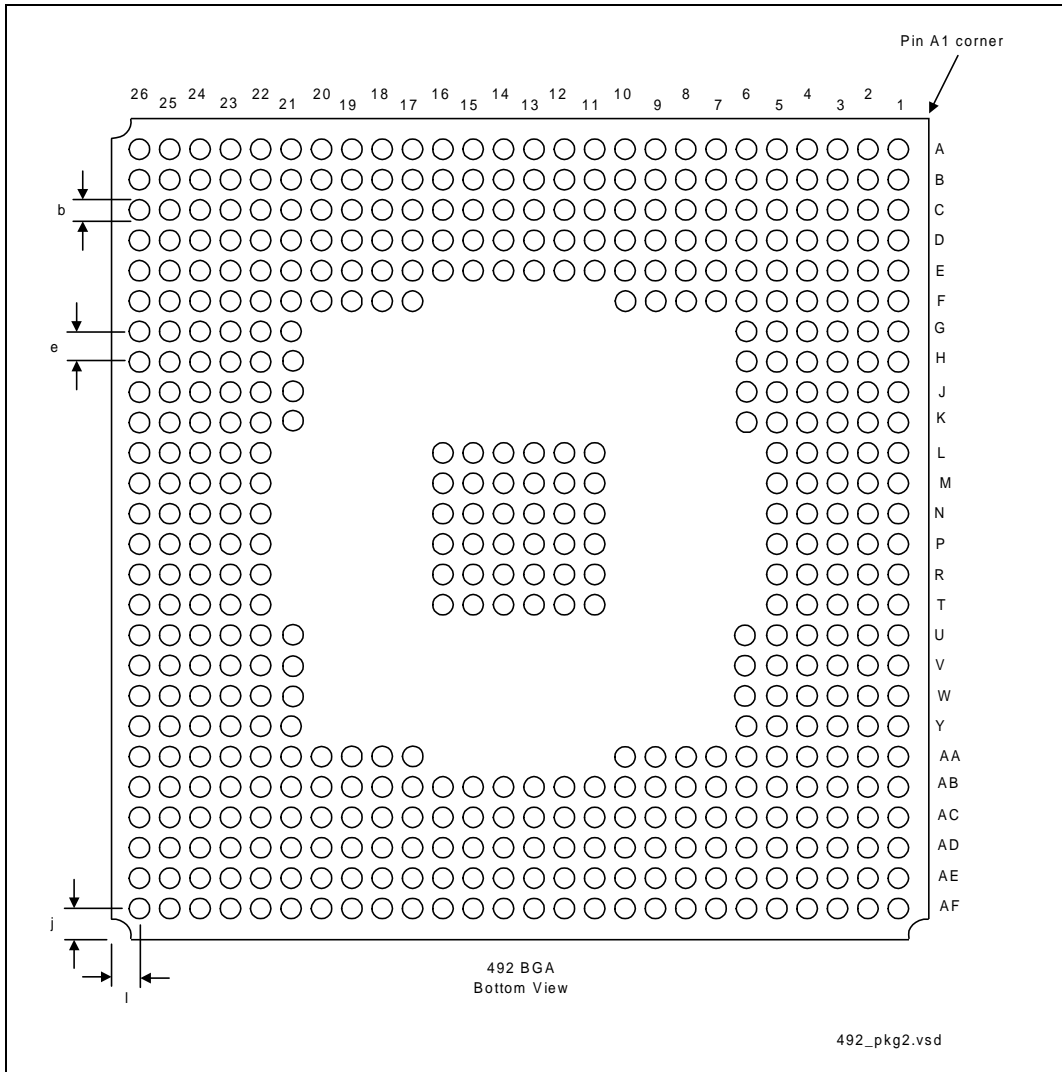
440MX BGA Package Dimensions (Bottom View)
